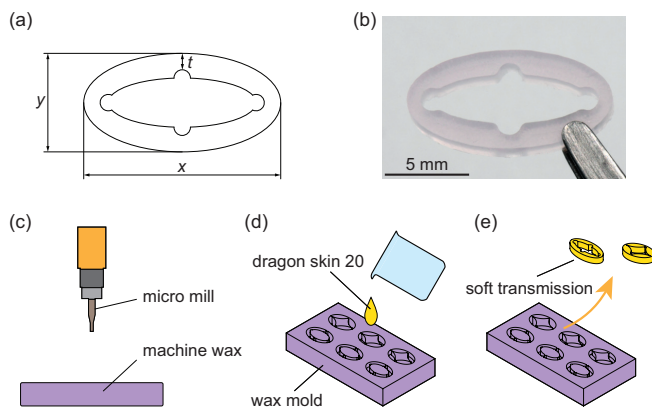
Soft transmission design and fabrication. (a) Transmission dimensions. (b) Silicon rubber soft transmission. (c) Building mold using micro mill. (d) Casting with *Dragon Skin 20*. (e) Remove parts from mold.
